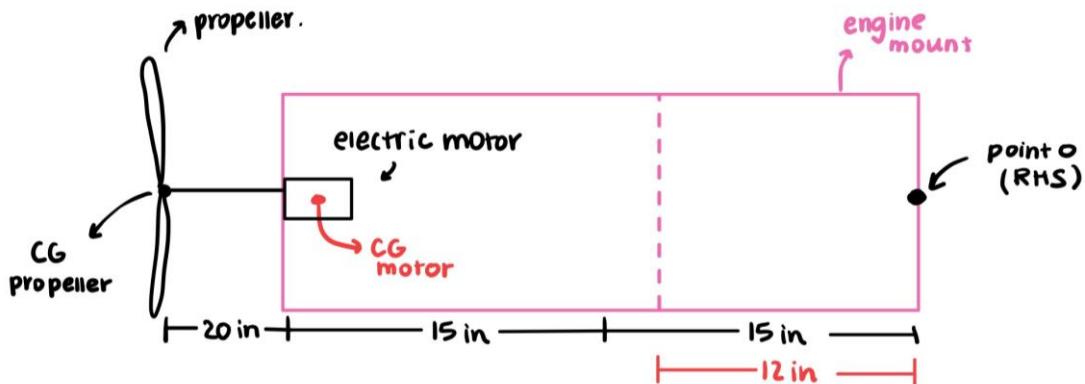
Schematic of Engine Mount, Electric Motor and Propeller
